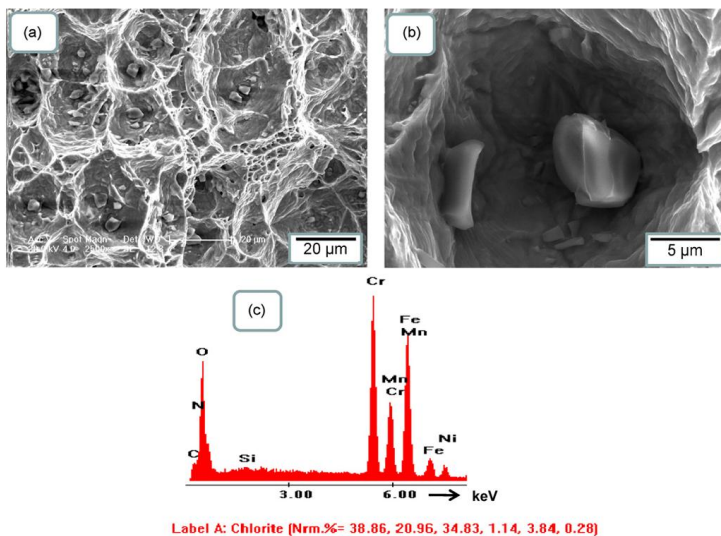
Representative morphology of the fracture in 304H steel (a) low magnification image, obtained from the 3 wt.% Cu containing alloy showing ductile dimple fracture (b) Higher magnification view showing chromium carbide particle in the cavities, (c) EDAX profile obtained from the particle confirming it as Cr_{23}C_6 .
